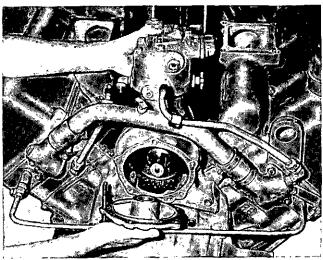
Installing air compressor V6-Vim/V8-Vine
